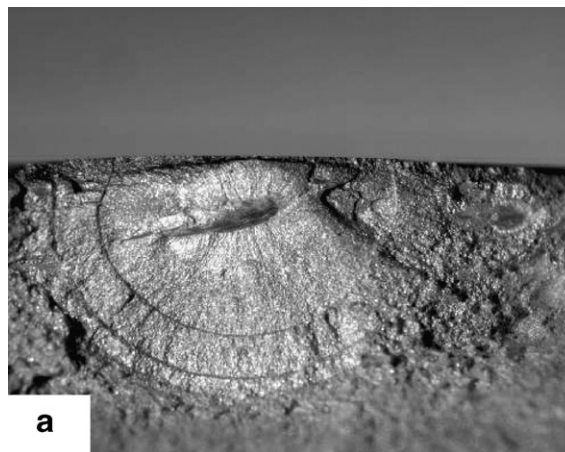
Typical fatigue crack initiation site in weld 2: tensile strength = 241 MPa, tool feed rate = 135 mm/min, tool speed = 423 rpm and tool pitch = 0.32 mm/rev and average fatigue life = 12746 cycles.
